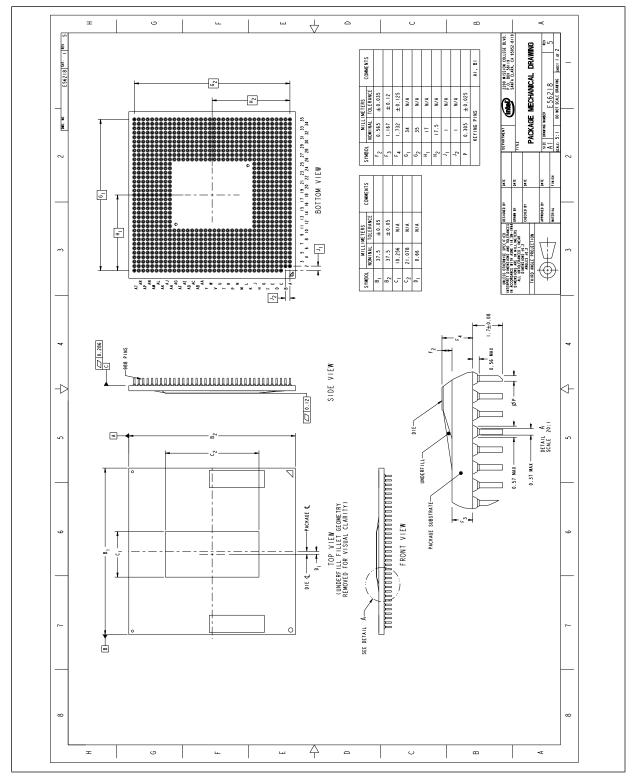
Processor rPGA988B 4C (GT2) Mechanical Package (Sheet 2 of 2)
